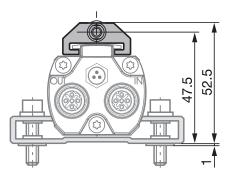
Dimensions and spacing with magnet BTL5-T-2814-1S
